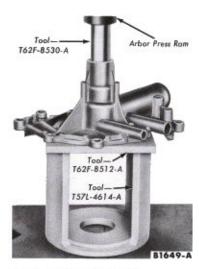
Shaft, Seal and Impeller Removal—Falcon
